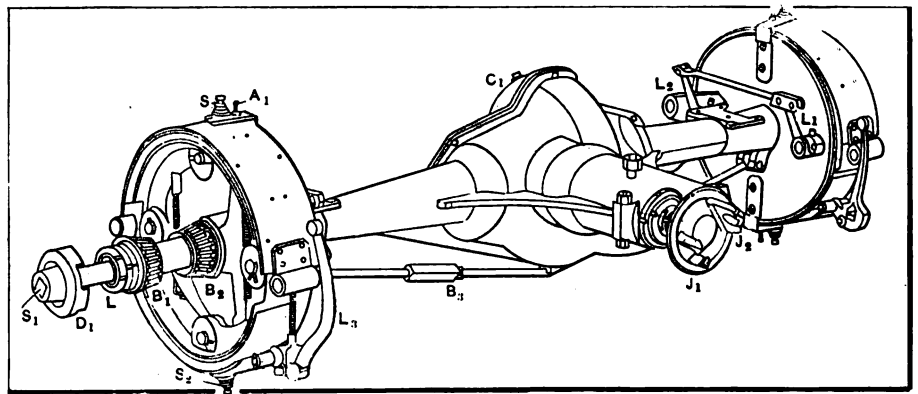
Live rear axle of the full floating type employed in Kissel Kars
